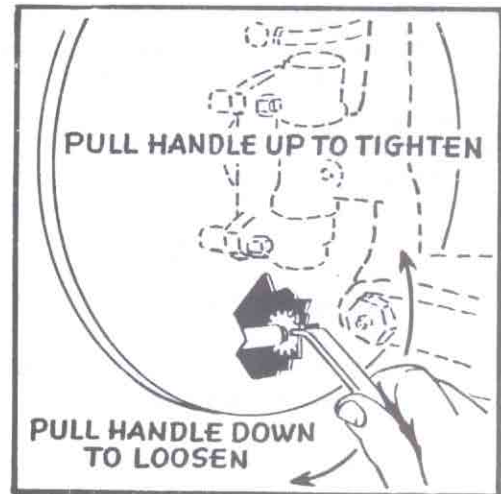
Bendix Brakes—Move the handle of tool towards axle to expand the shoes and away from axle to retract them
